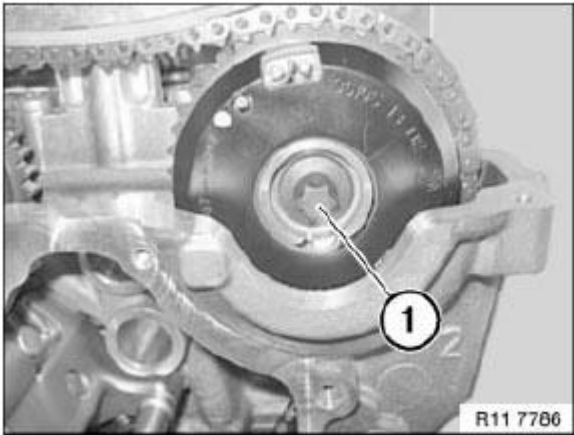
Identifying Central Bolt Of Exhaust Adjustment Unit
